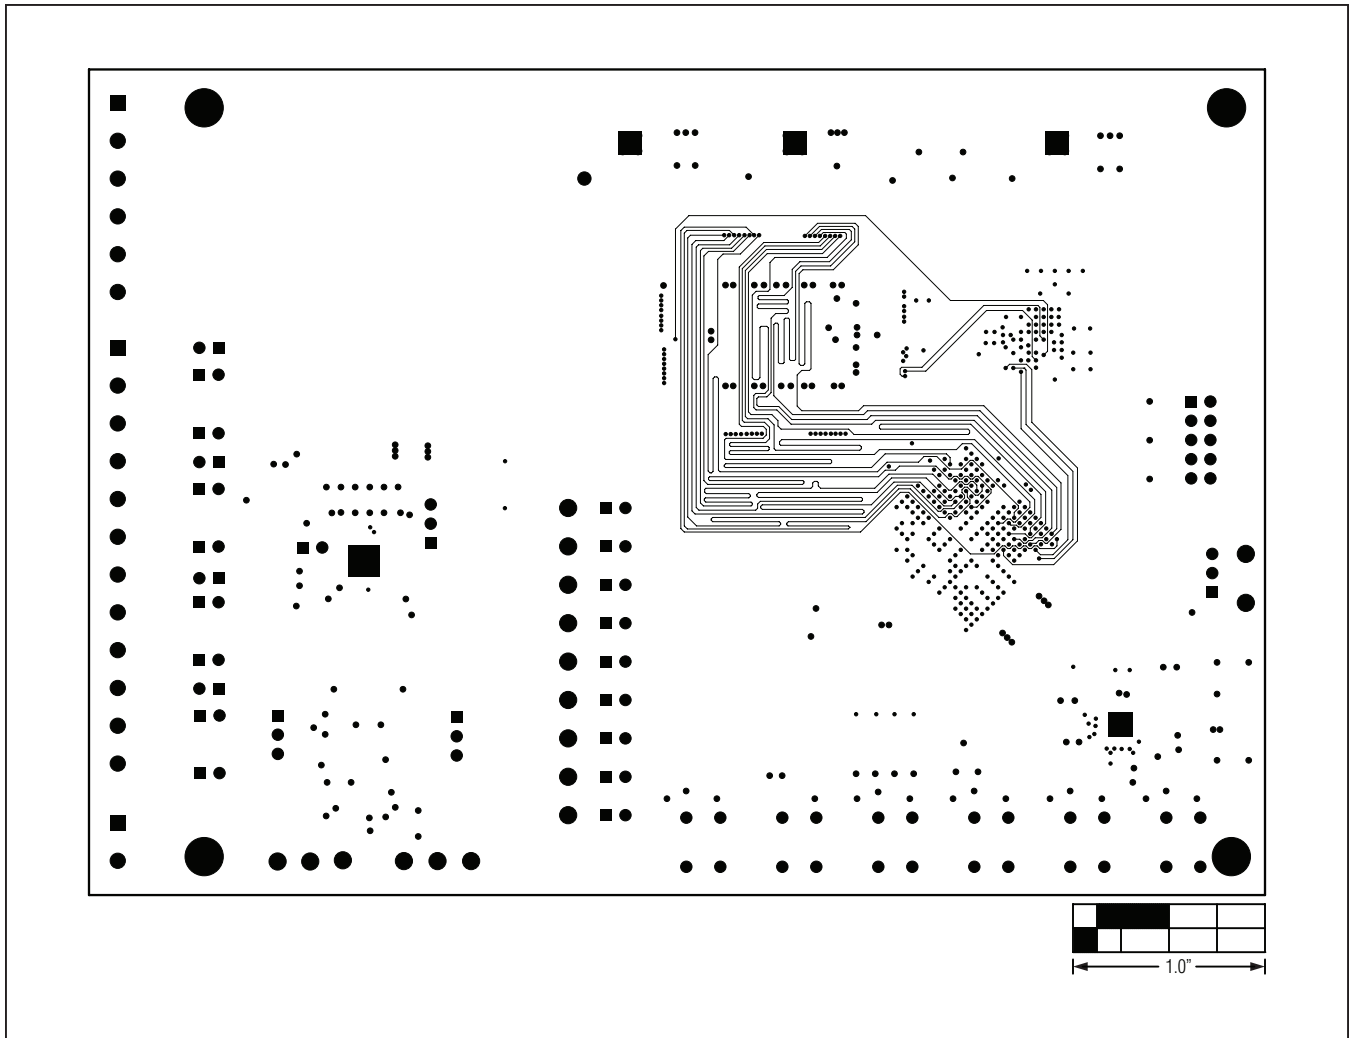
MAX11043 EV Kit PCB Layout—Signal Layer 3
